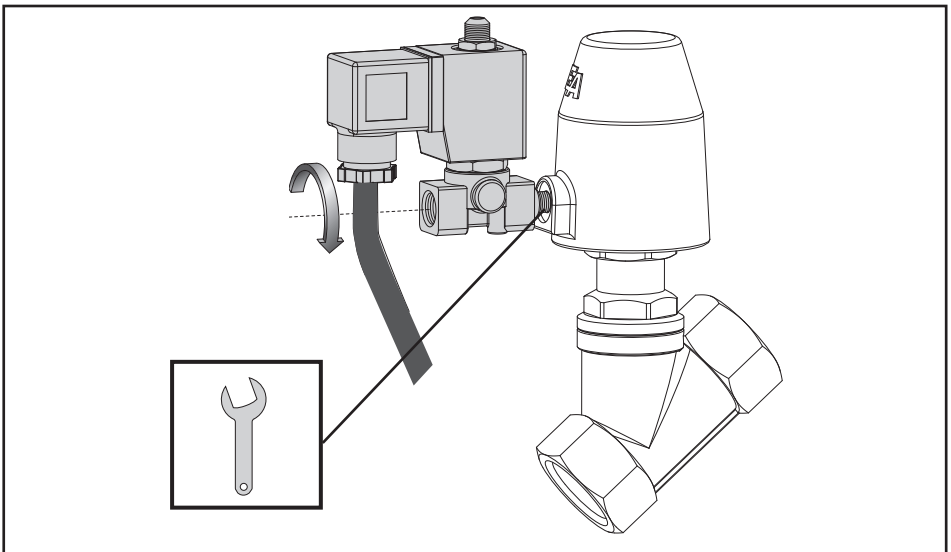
mounting / disassembly - mounting of a pilot valve
